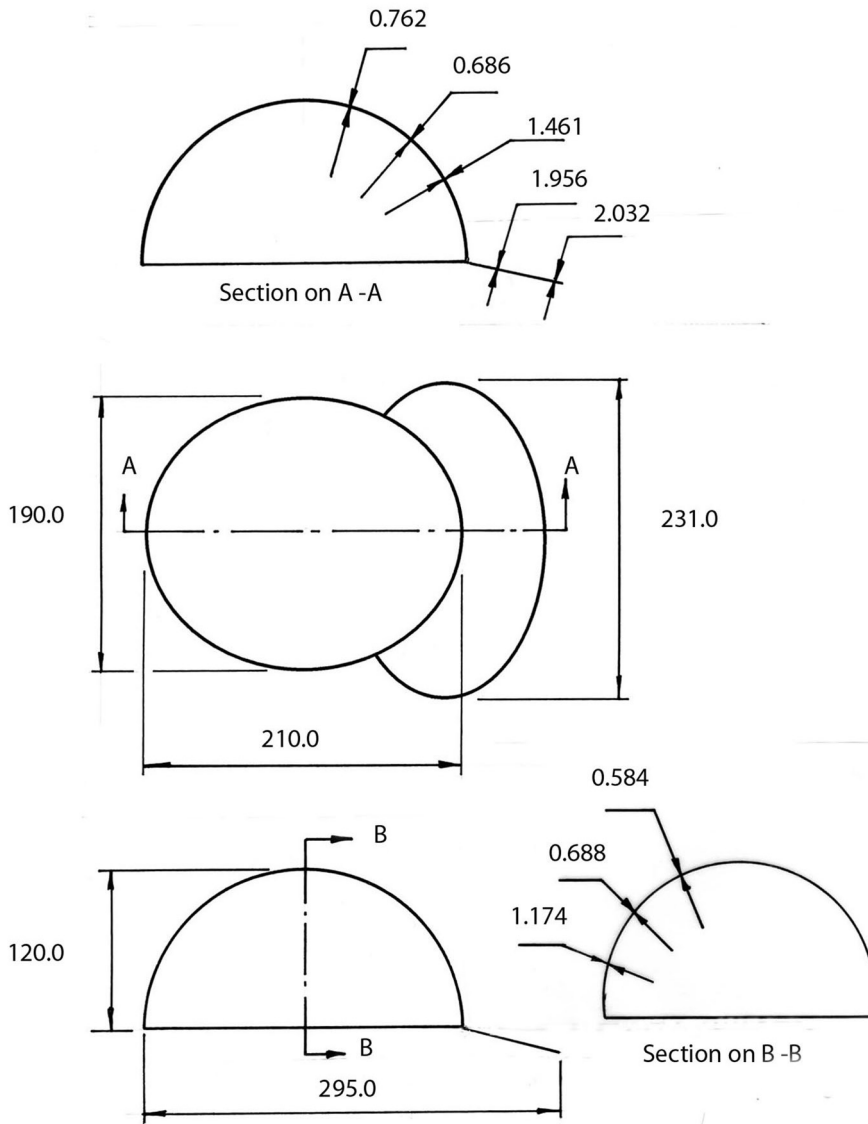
The principal dimensions of the Thames Coolus (dimensions in mm; drawing not to scale)
